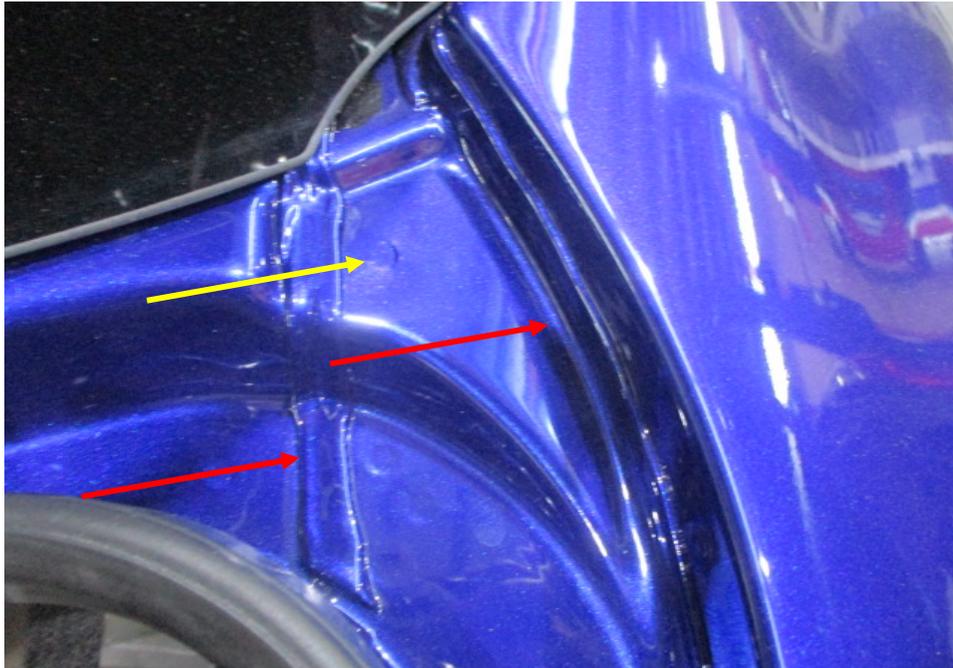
shows the area where the rear right body panel of the Motor Car is welded onto the rear speaker panel (for comparison purposes with photograph 33 above). The sealant (red arrow) joining the body panels was original factory sealant. Original spot weld marks (yellow arrow) were also seen on the rear right body panel of the Motor Car.
